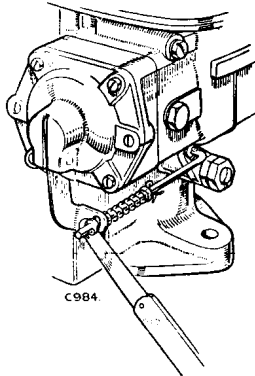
Setting accelerator pump operating rod, showing .020 in. feeler gauge
